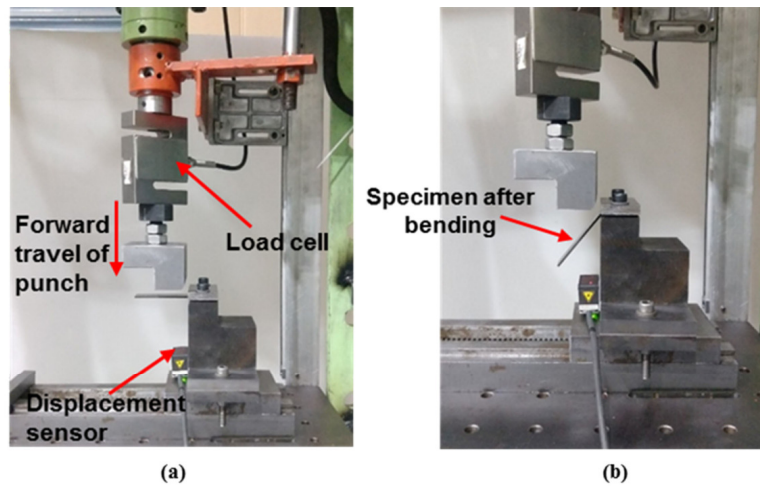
Edge bending of a W-DED specimen (a) before punch movement, (b) punch retracted after punch stroke.
